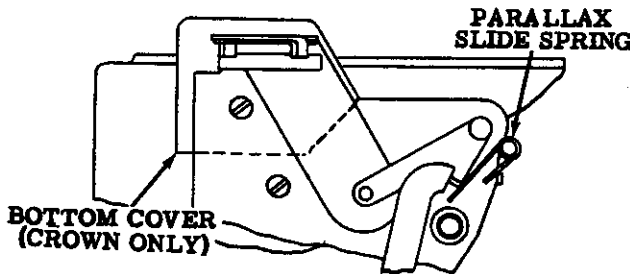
VIEWFINDER PARALLAX SLIDE SPRING
